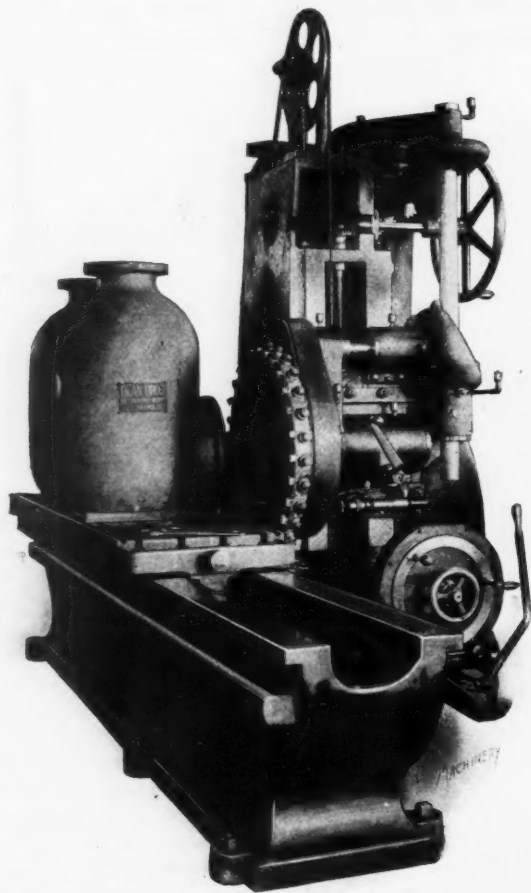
Ingersoll Machine Milling Flanges of Steam Pump Air Chambers
